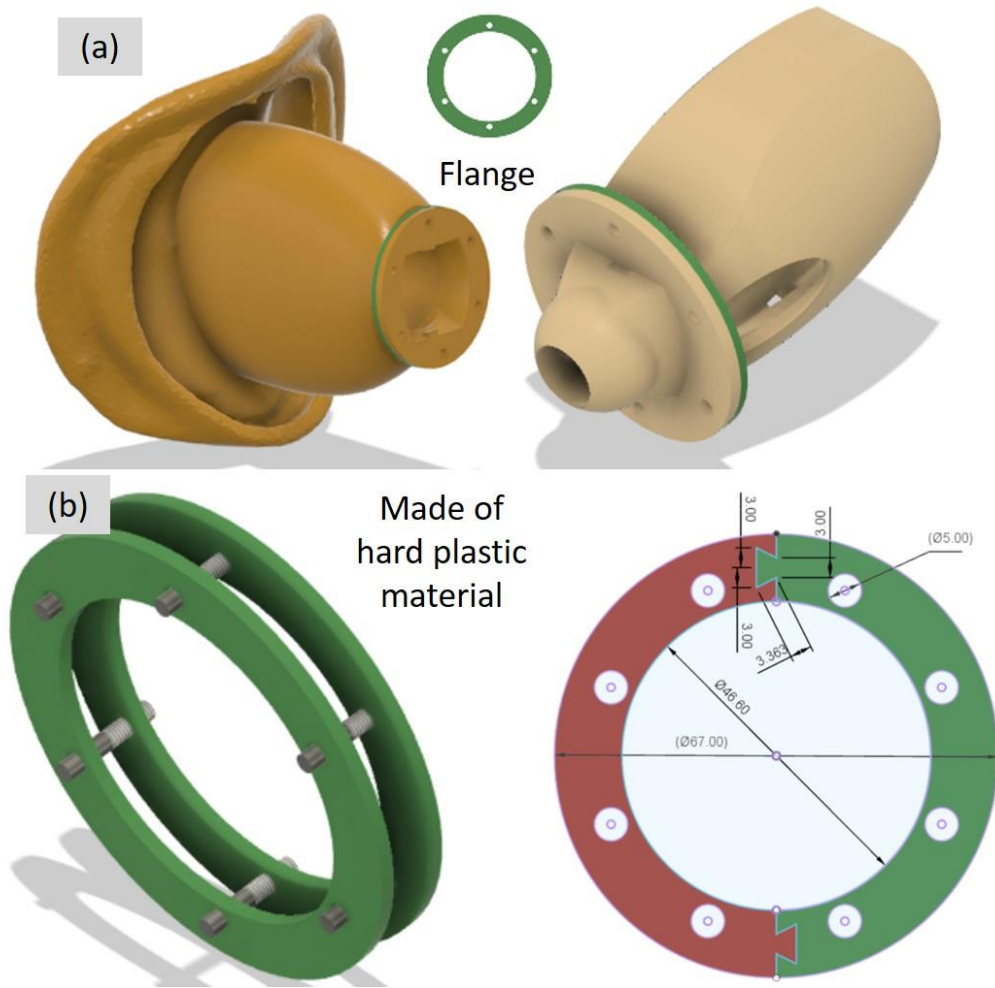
Flanges (a) Vaginal Canal with Plastic Flange (b) Flanges held together with bolts
